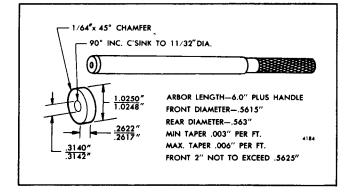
Fabrication of Governor Housing-to-Base Alignment Tool
